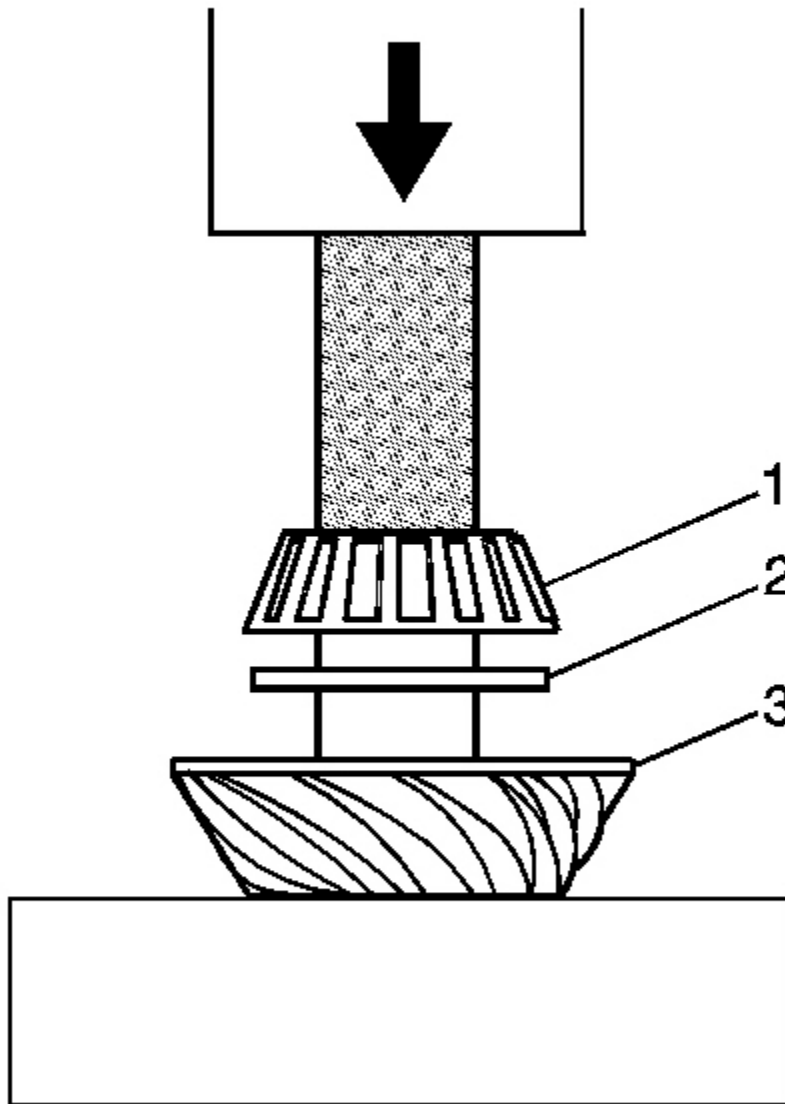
Using J35664 Position Pinion Shaft Into A Press
